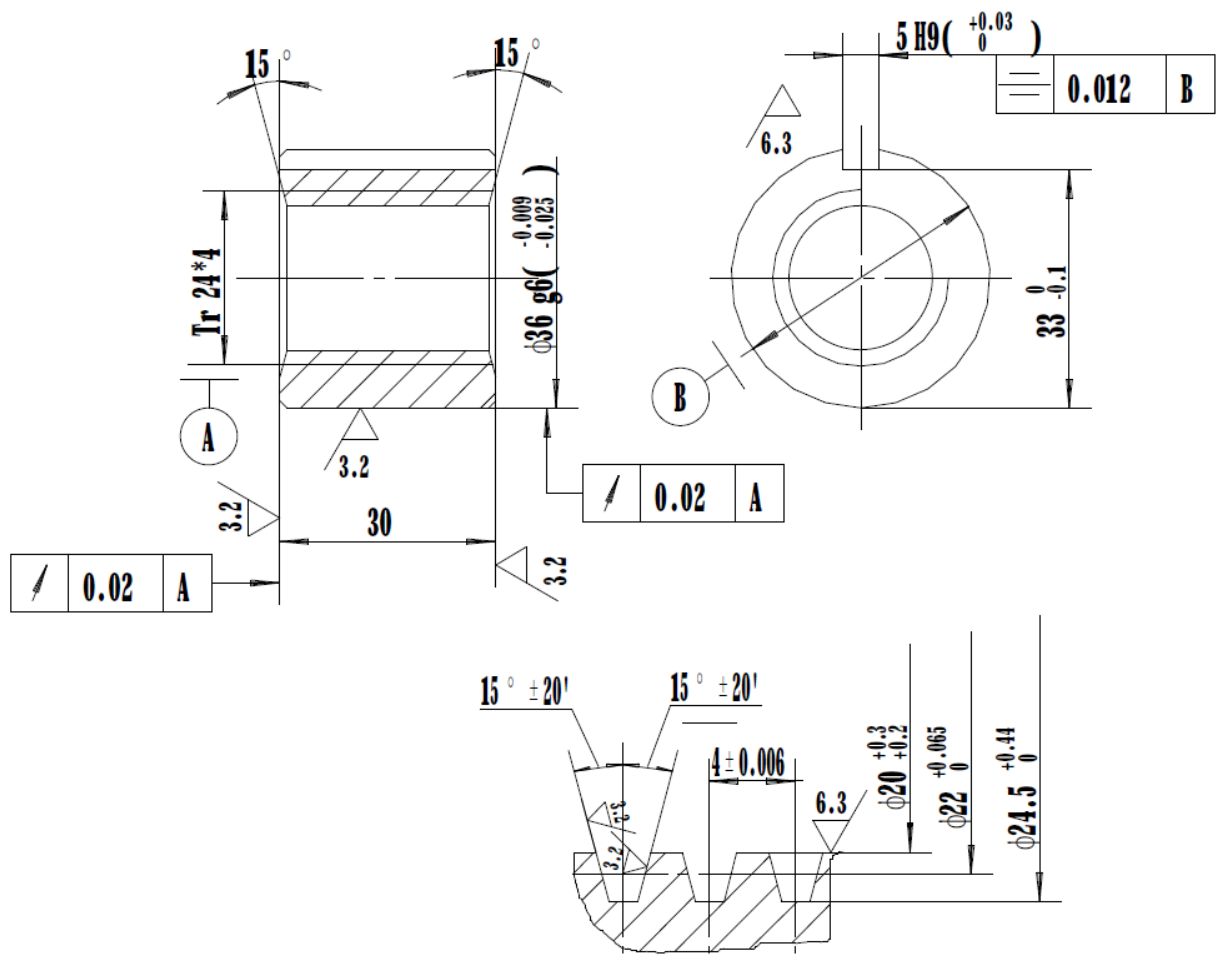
Name: Elevating nut	Material: ZA30-C
